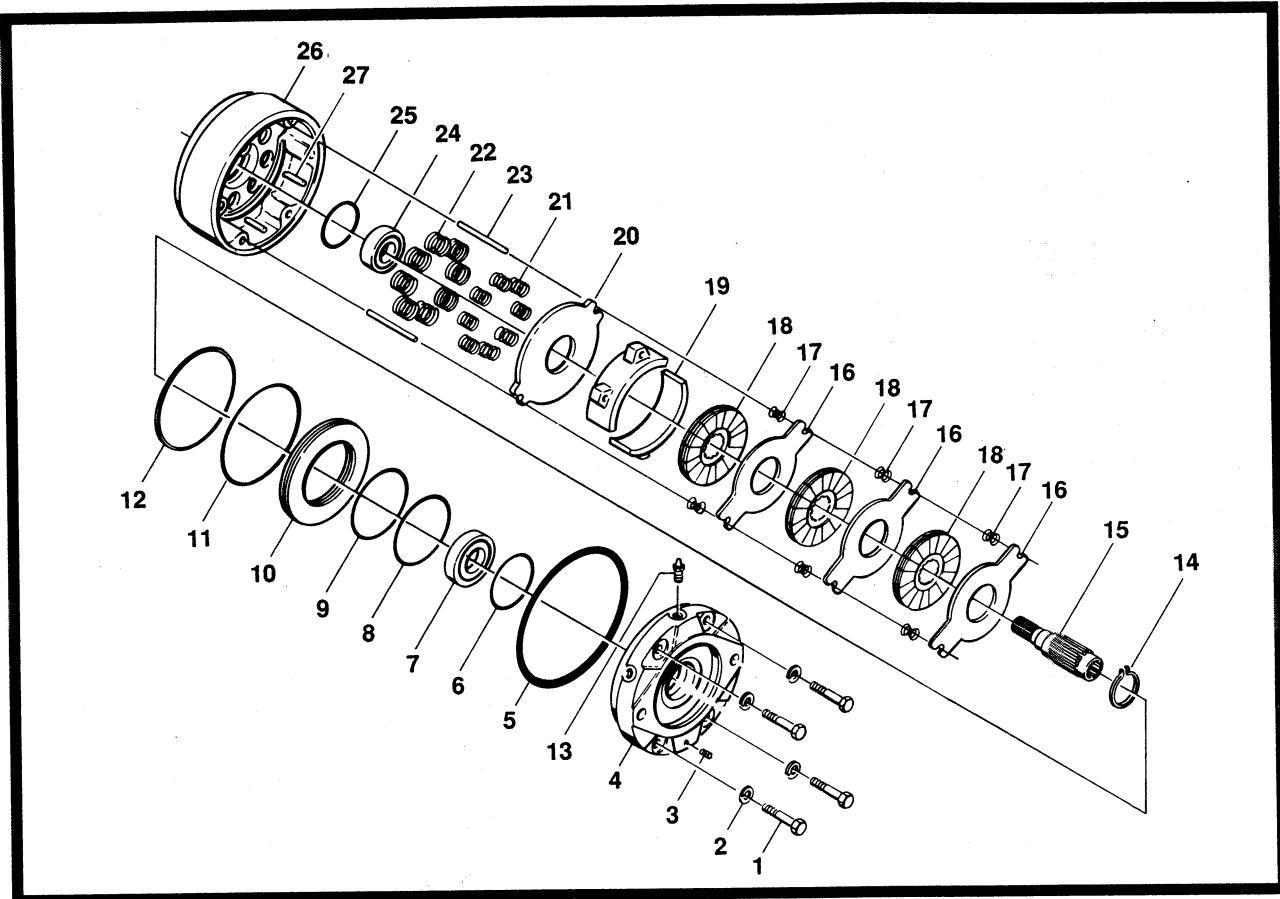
Swing Brake Assembly - Mico (Machines Built Prior To May 1992).
